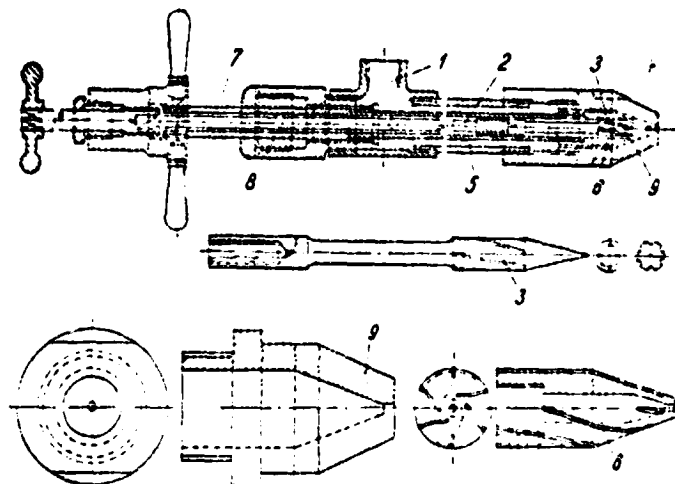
Fuel oil spray nozzle for rotating furnaces of the "Bol'shevik" cement plant.
